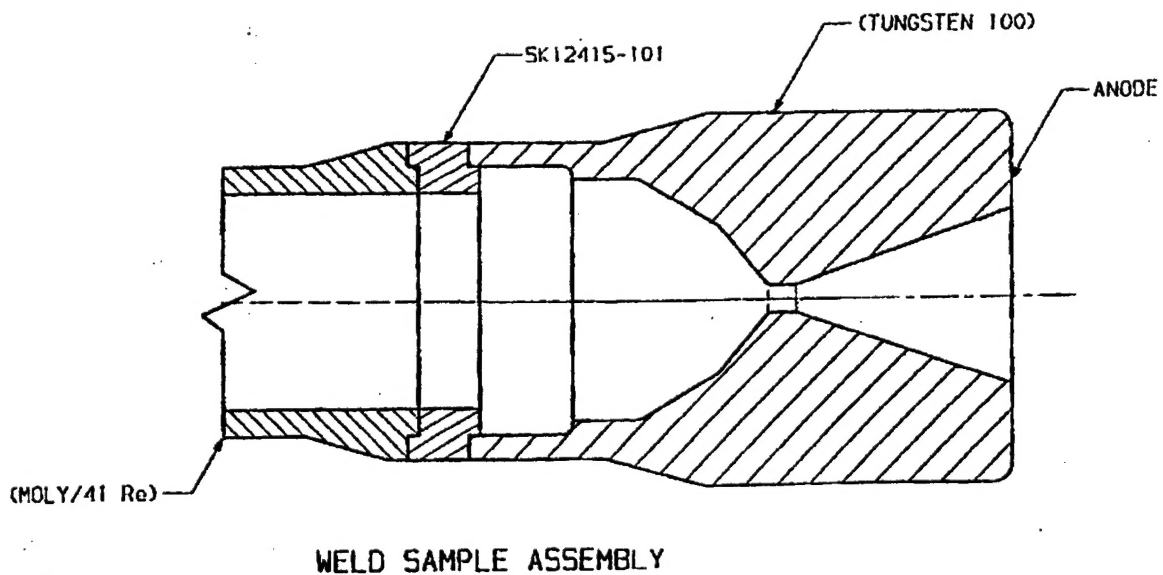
Alternate EB Weld Configuration with a W24/Re Ring
